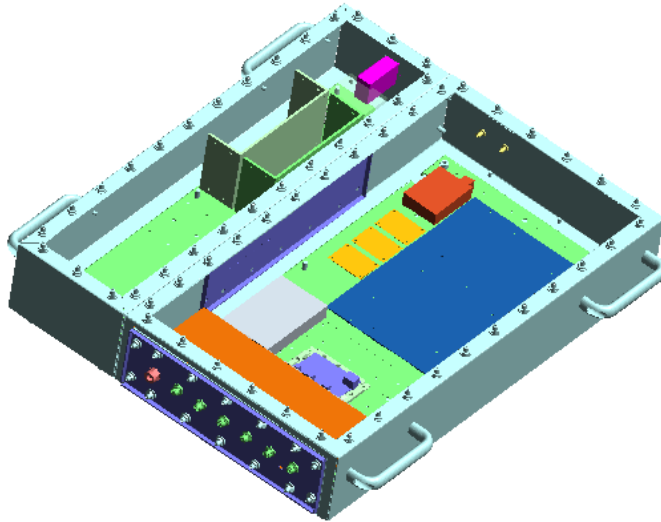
3D drawing of EMC optimized Charging Discovery System
